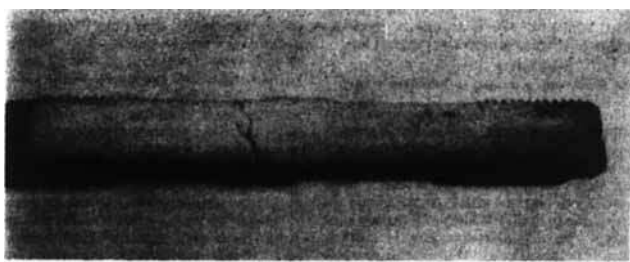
Caustic cracking of flange bolt from circulating pump of boiler.
